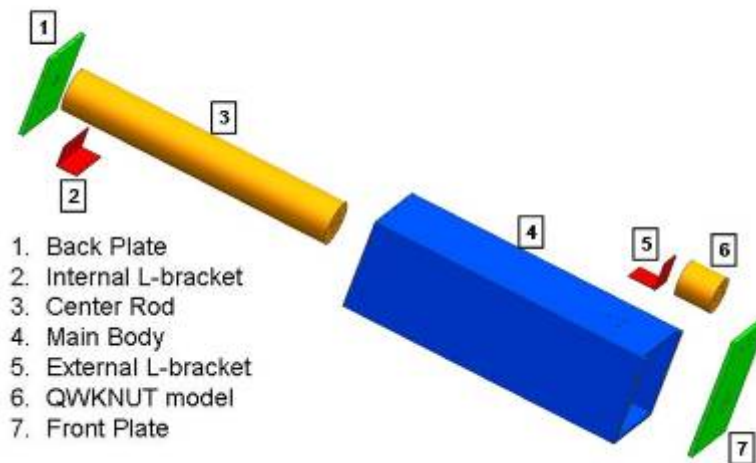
Exploded view of NPSCuL P-POD Mass Model (P2M2) components
